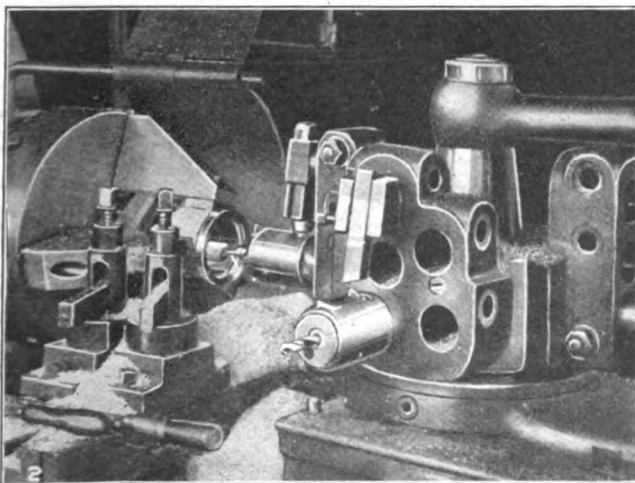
MACHINING FIELD CASES. FIG. 3—MACHINING GEAR-CASE COVERS
